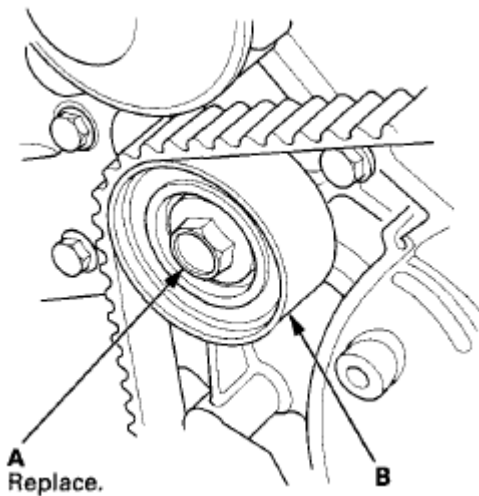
Removing Idler Pulley Bolt And Idler Pulley
